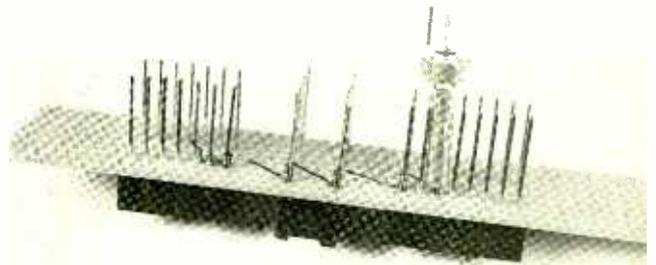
SLIT-N-WRAP tool from Vector Electronics has wire stripper built-in so the wire is automatically stripped as it is wrapped.
